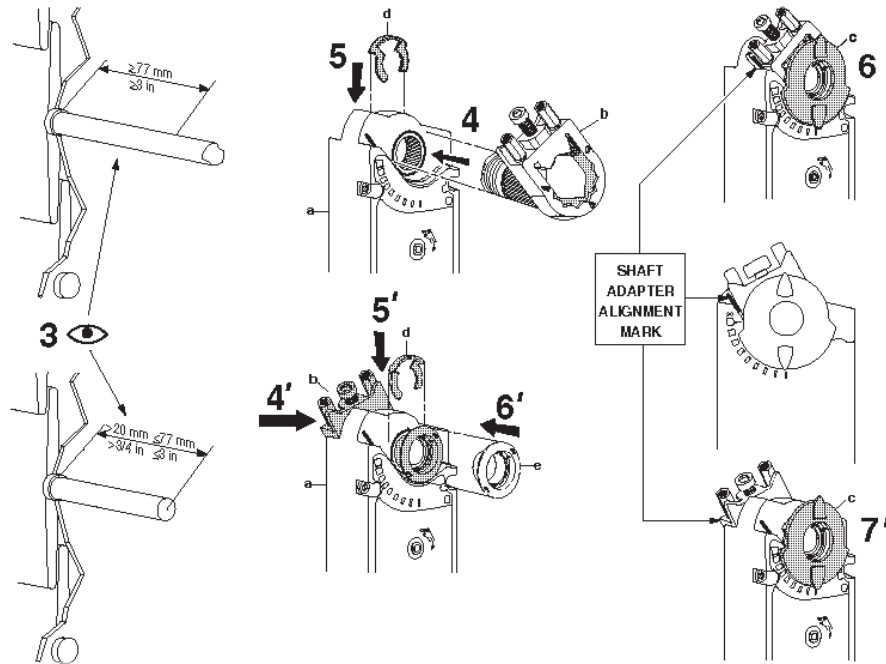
Shaft Length and Proper Shaft Adapter Location.
